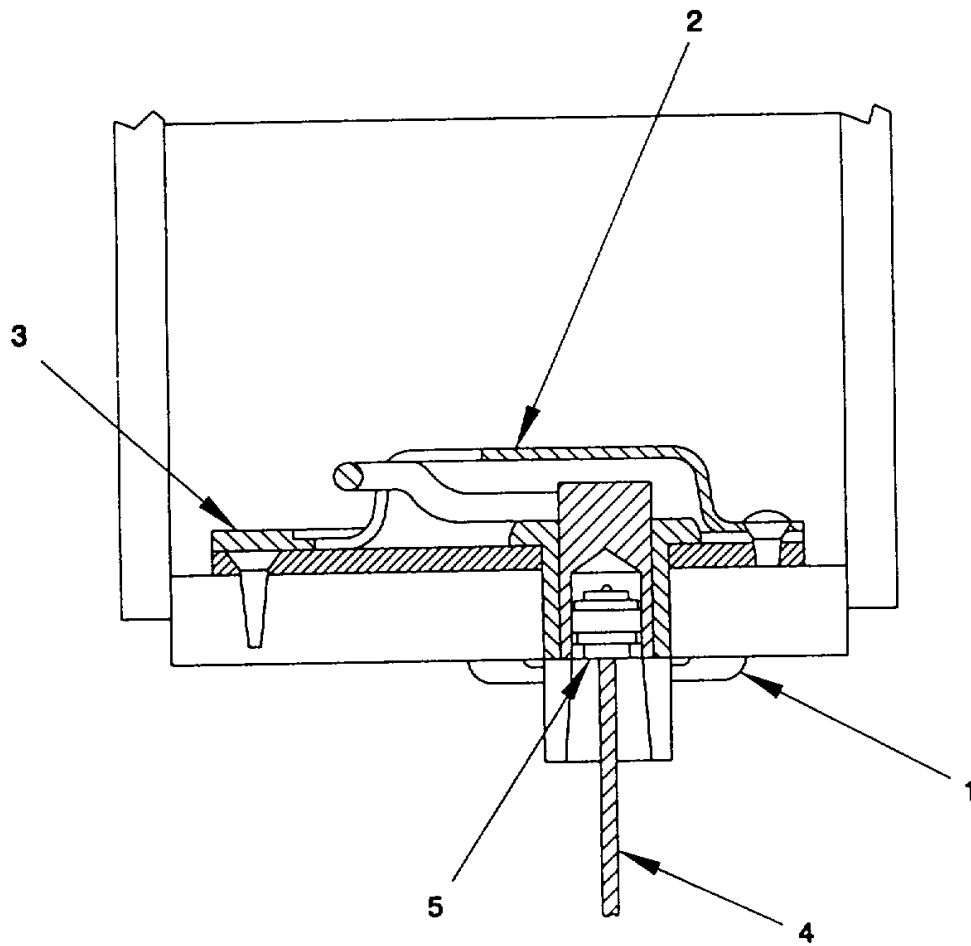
Remote Cable Pull Box and Cable, Fire Suppression System, Remove/Install
